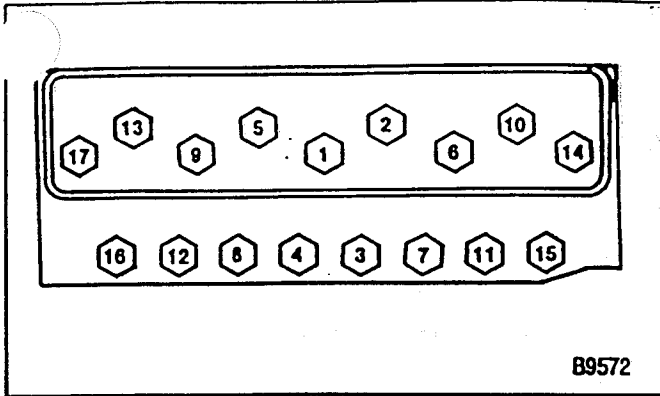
Cylinder Head Bolt Tightening Sequence (5.0L and 5.7L Engines)
